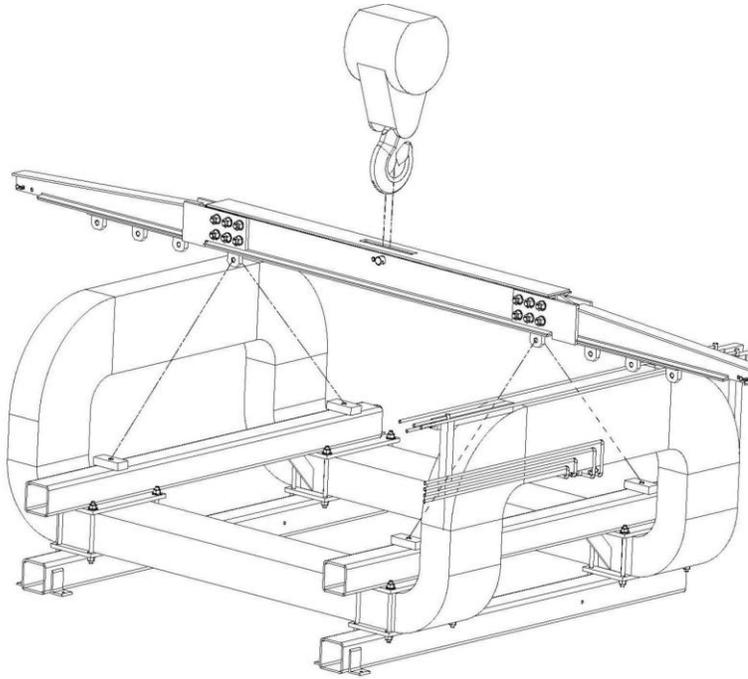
Using the coil lifting turning fixture to lift the coil horizontally
